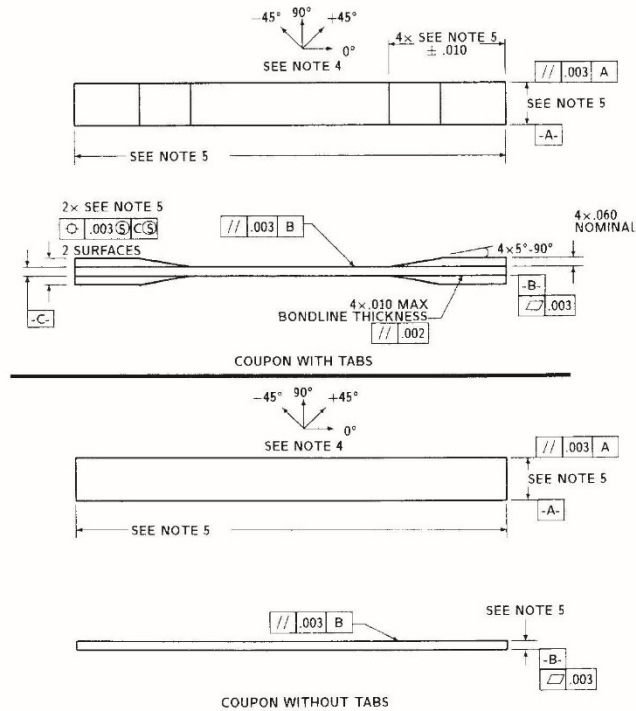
Tension Test Specimen Drawing (inch-pound)
